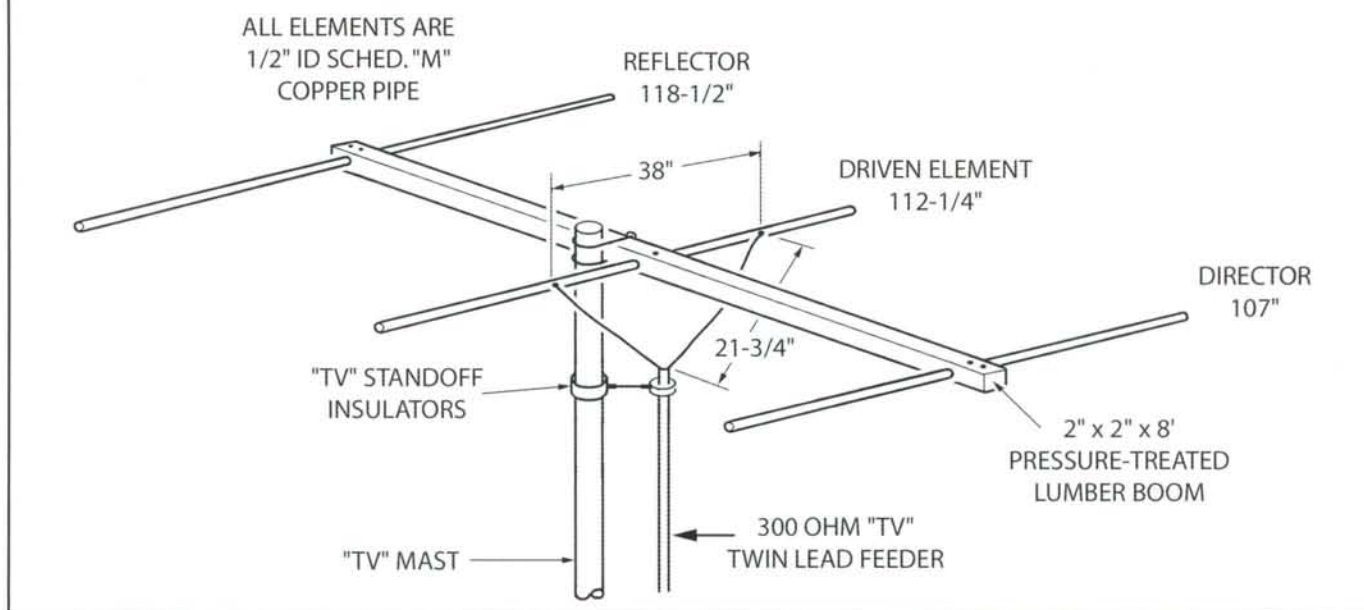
The completed three-element 6-meter beam. (Drawings courtesy Randy Kaeding, K8TMK, Heathkit Co., Benton Harbor, MI)
